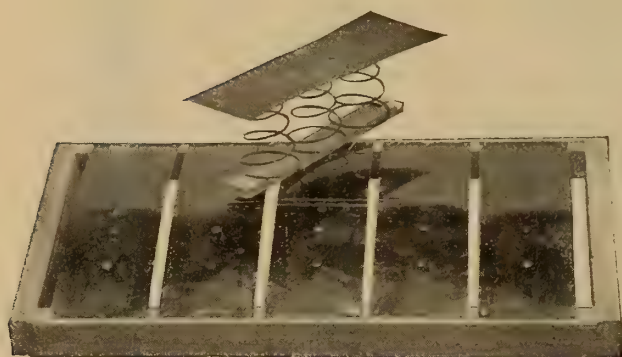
SPRING PLATE AND SPRING CONSTRUCTION.
